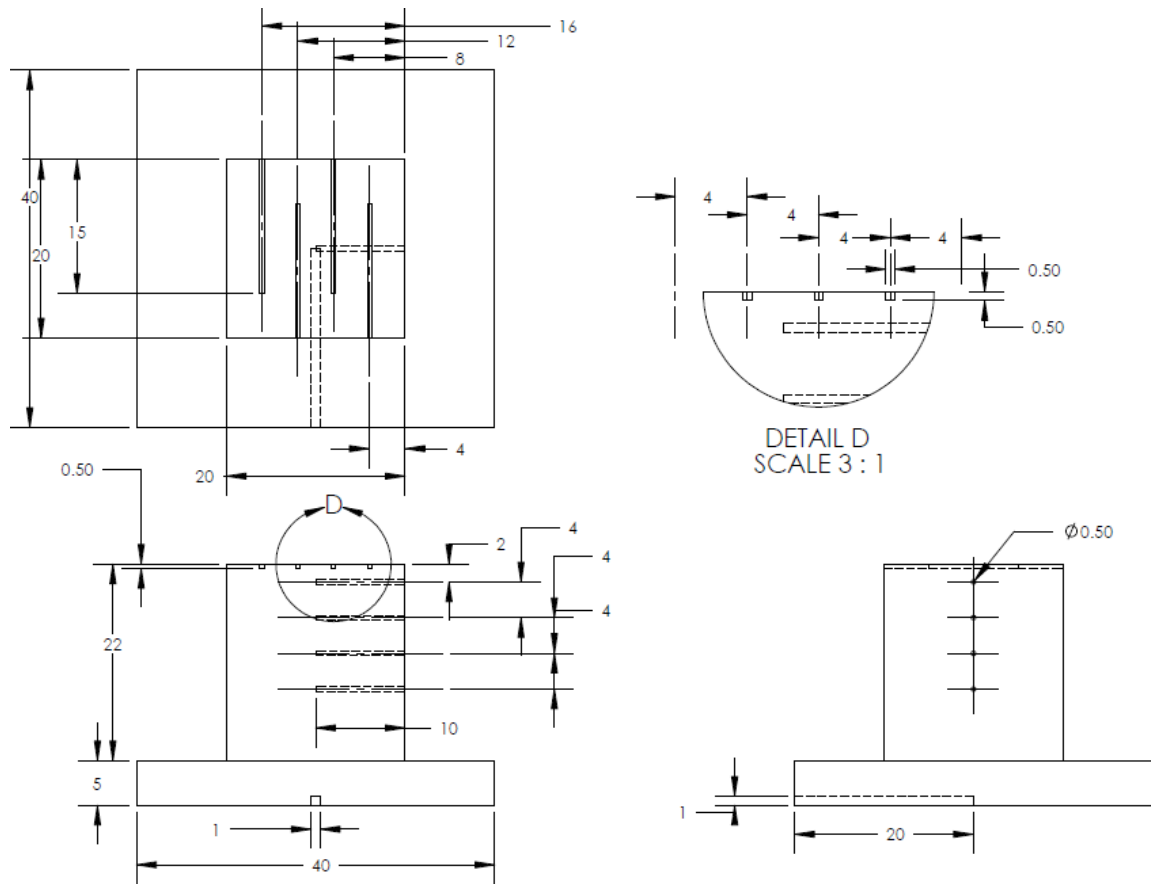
CAD drawing of the aluminum block (all measurements in mm).
